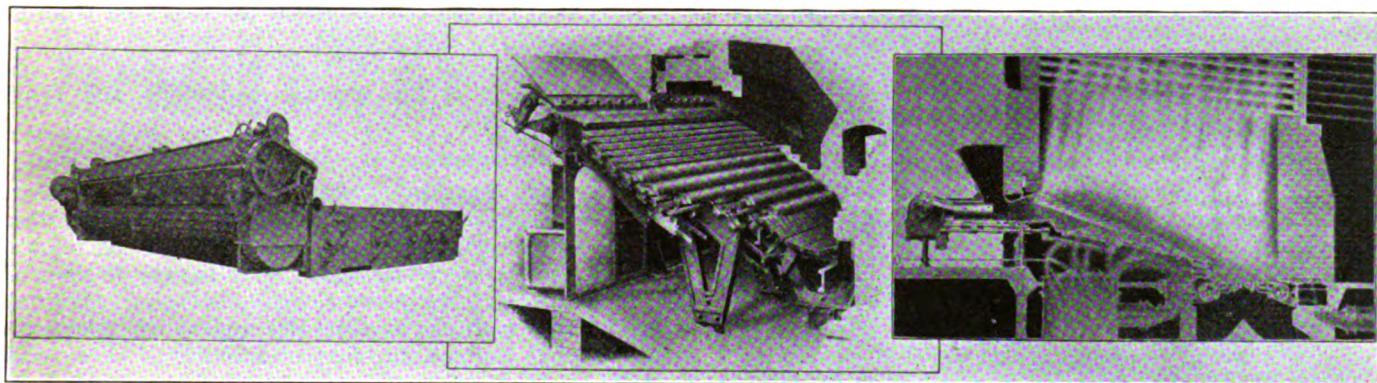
View of a chain grate stoker showing grates in course of passage over the front sprocket, the regulating and control mechanism, etc. An advantage of this type of stoker is that the entire device can be readily removed from the furnace for repair or inspection without disturbing the boiler or setting. FIG. 2.—Sectional view, in perspective, of a mechanical stoker of the overfeed type. Details of grate construction are clearly shown. FIG. 3.—Longitudinal section through a typical underfeed type of stoker. The actual relation of the fuel and fuel bed to the operating mechanisms of the stoker is clearly shown.
